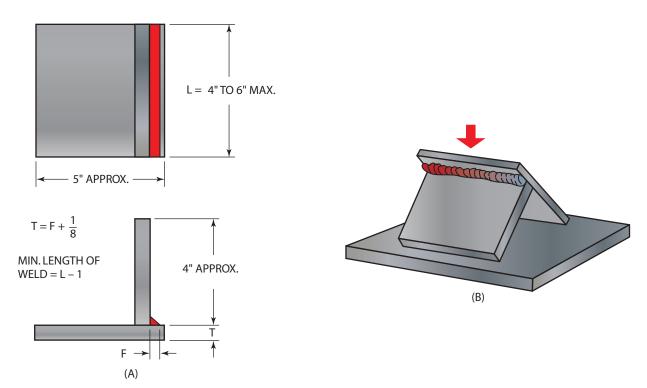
(A) Fillet weld break test and (B) method of rupturing fillet weld break specimen.
